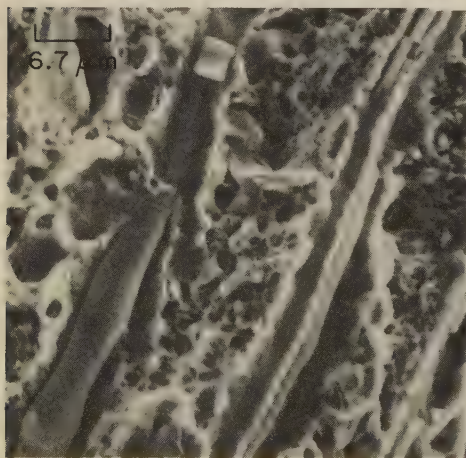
Fracture surface of a cast aluminum alloy A357-T6 air-turbine blade
